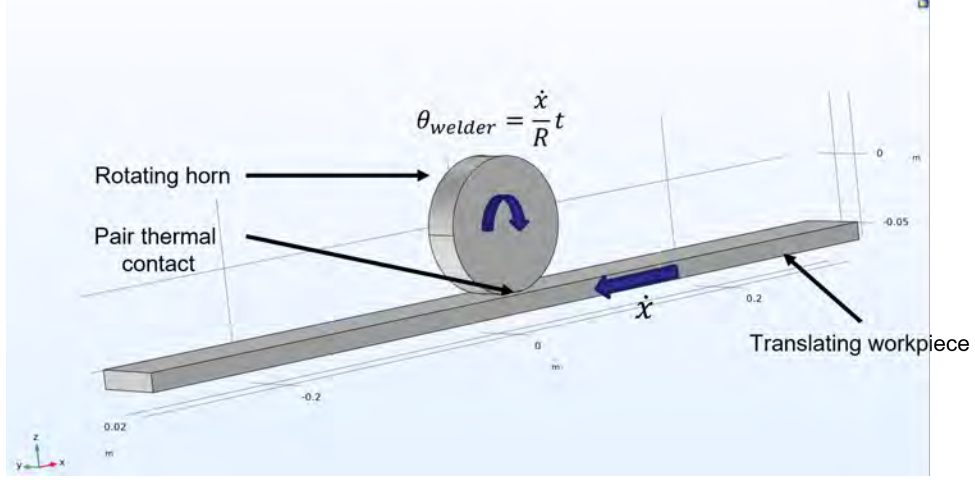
A transient thermal simulation of the rotating welder and the translating workpiece simulated using COMSOL. The welder rotates such that there is no rolling slip with the workpiece. The weld foils and the baseplate are modeled as one piece since they are all made of aluminum alloys. A pairwise thermal contact is defined between the welder and the workpiece, with heat generation at the interface.
